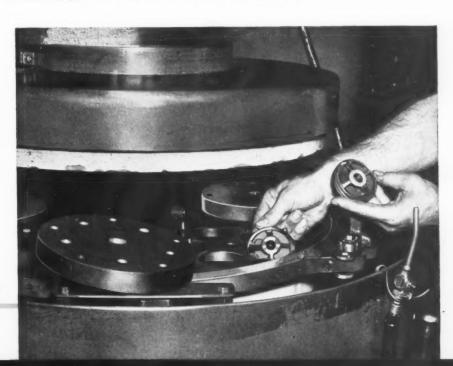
The Door-closer Valves are Held on the Magnetic Chuck of a Rotary Surface Grinder while being Ground to Height
